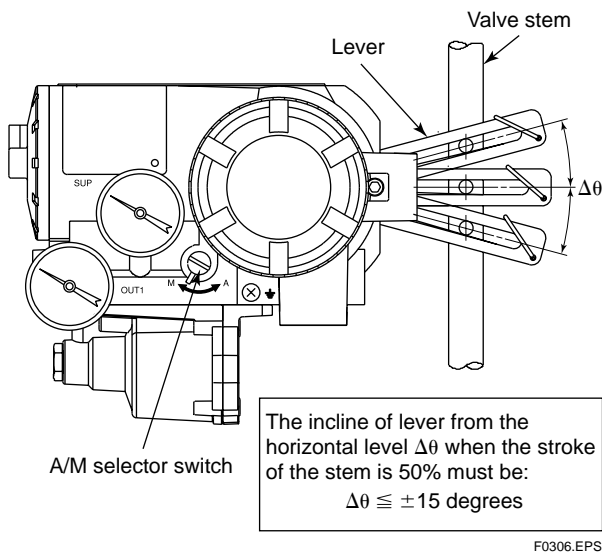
Checking Position at Which Clamp Should Be Fixed
